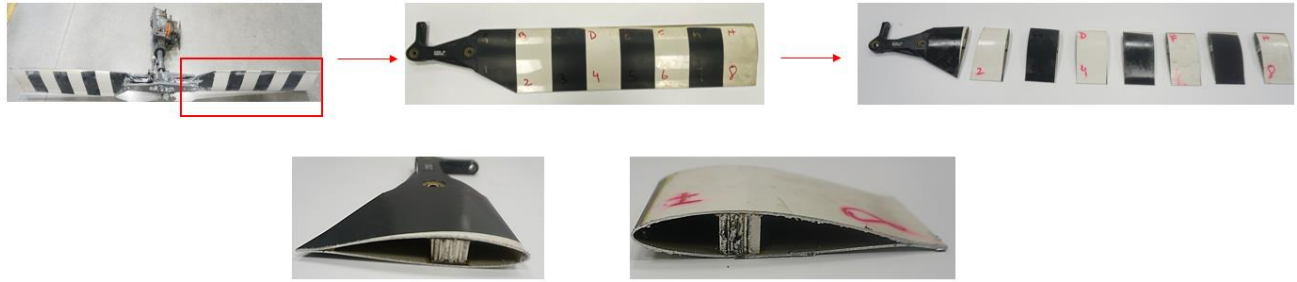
Part 27 Rotorcraft tail rotor blade dissections.
